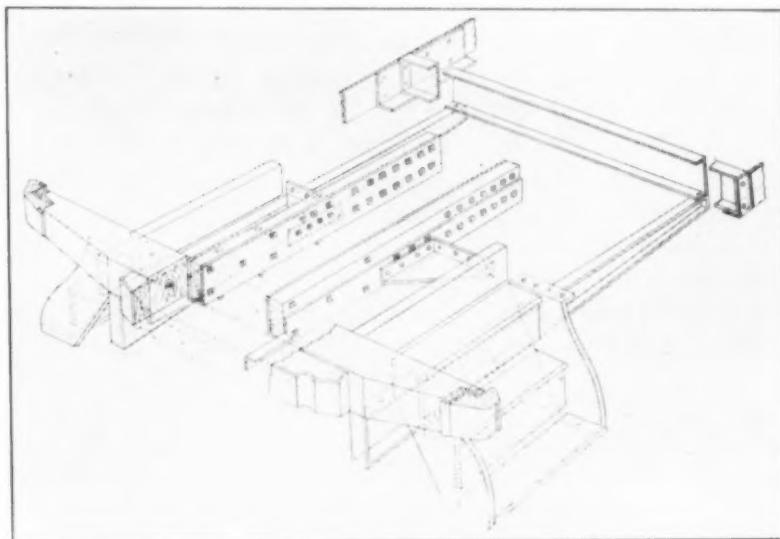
SKELETON OF PLATFORM MEMBERS, STEEL AND WOOD CONSTRUCTION
